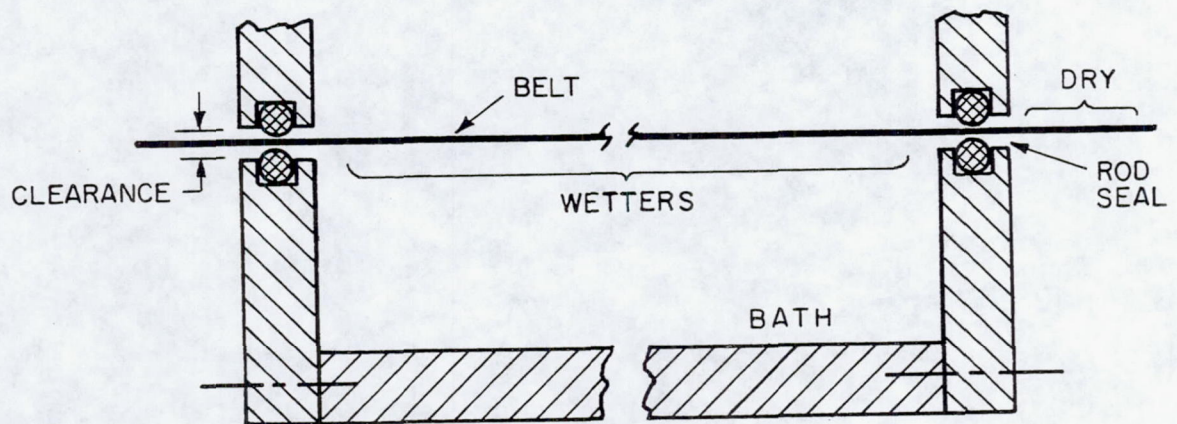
Scraper and Clearance End Seals with Seal Rod Preload Load Subassembly
